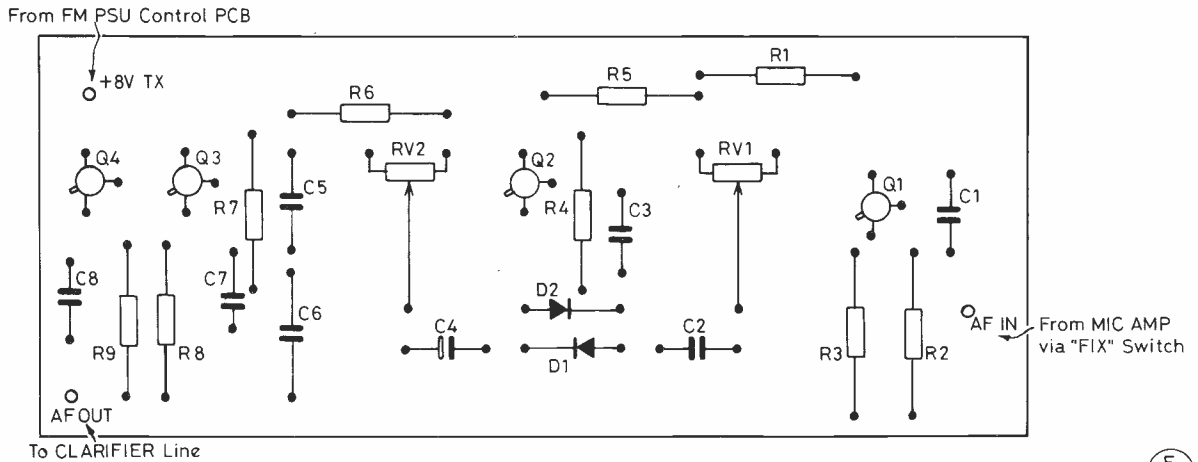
FM CONVERSION FT-707 MODULATOR COMPONENT LAYOUT
